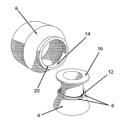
The fully retracted SMP ring which has caused the two parts to the IM compliant mechanism to become separated [10]
